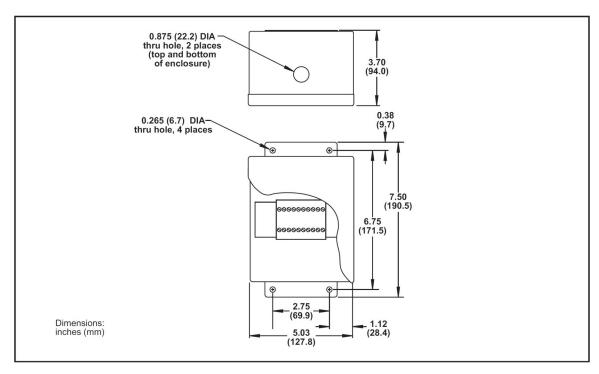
Position Transducer Junction Box (Old): Mounting Dimensions
